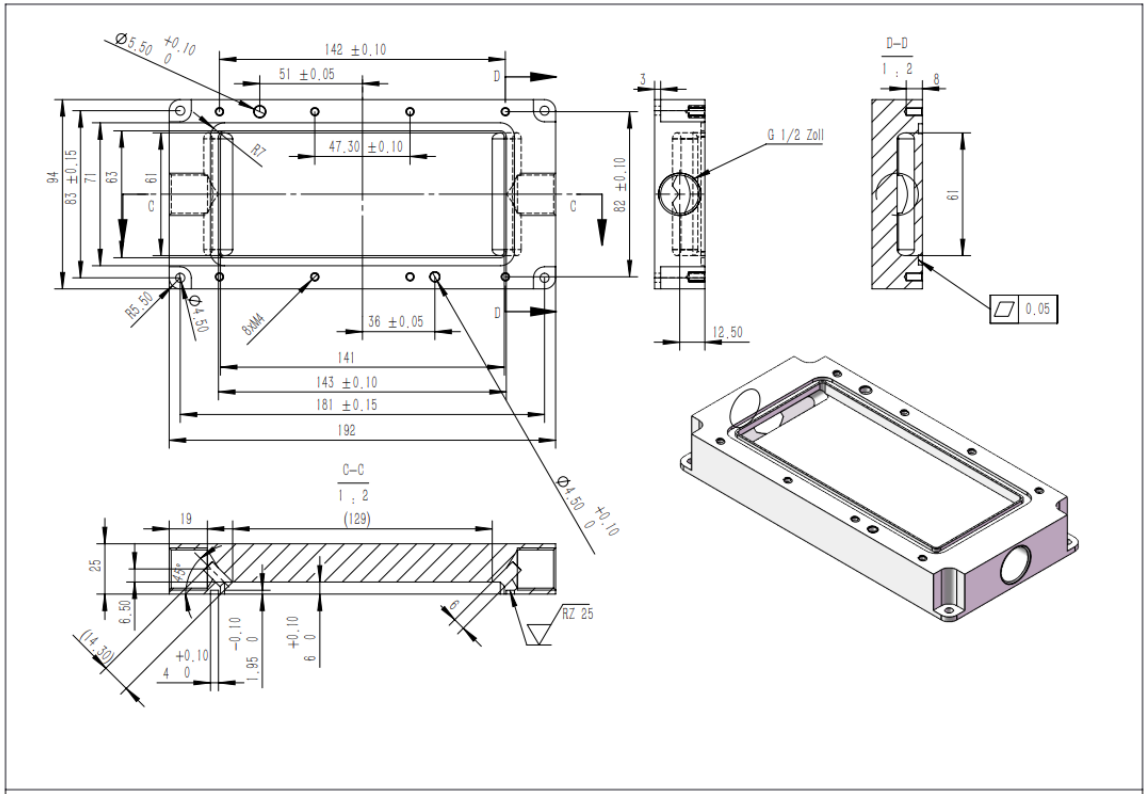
The mechanical drawing recommendation for the cooler, Material: AlMgSi0.5
